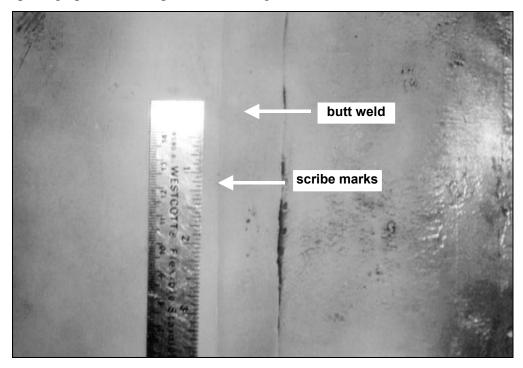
Test Setup Around Butt Weld during Crack Initiation and Propagation
